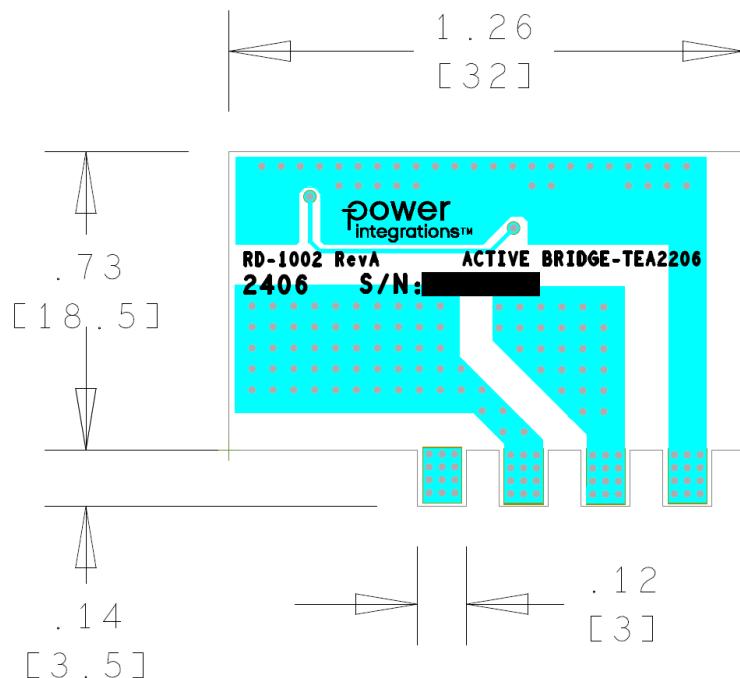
Main Board Printed Circuit Layout, Inner 2.
